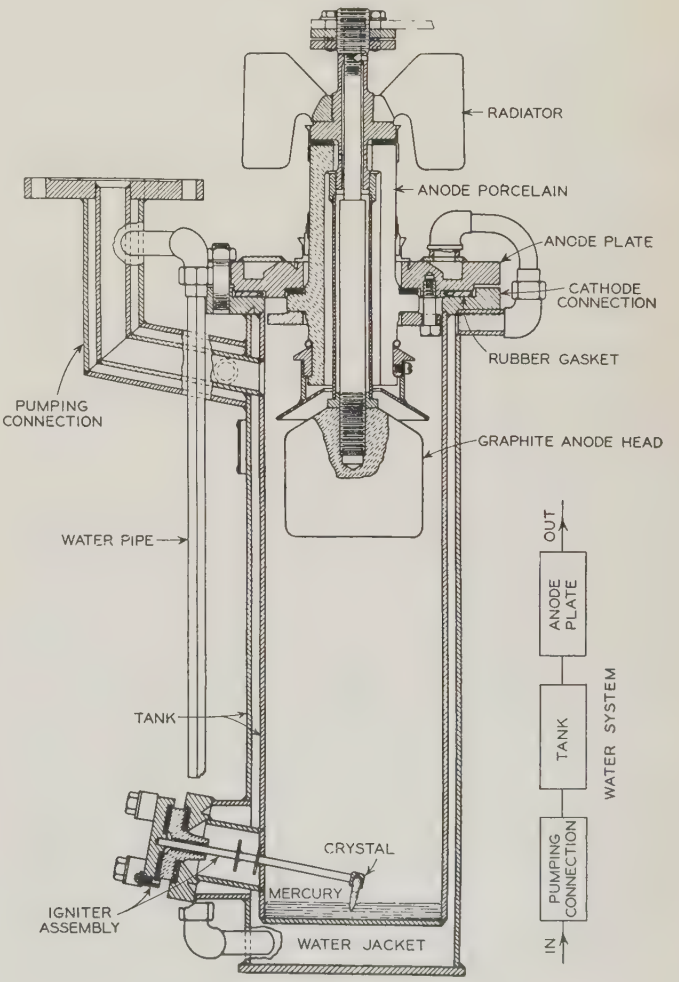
(right). Cross-sectional view of the "ignitron" welding rectifier
